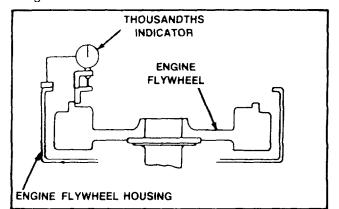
Checking the Driving Ring Pilot Bore of the Engine Flywheel Housing
